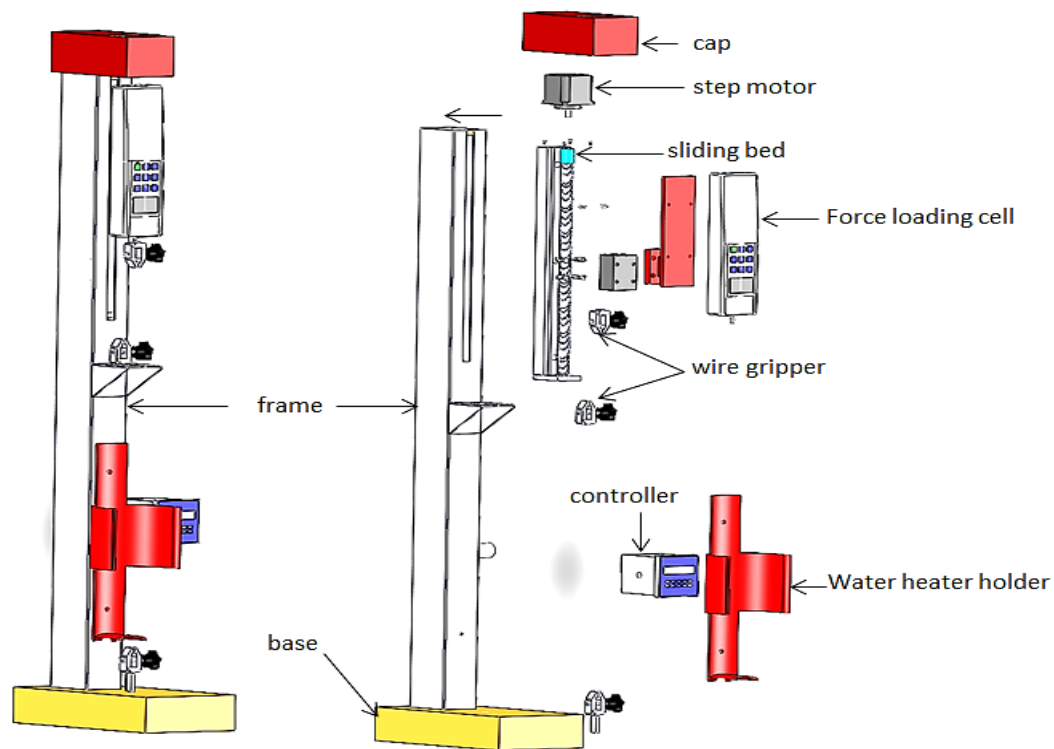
SMA Spring tension test machine (left), Exploded View (right).
